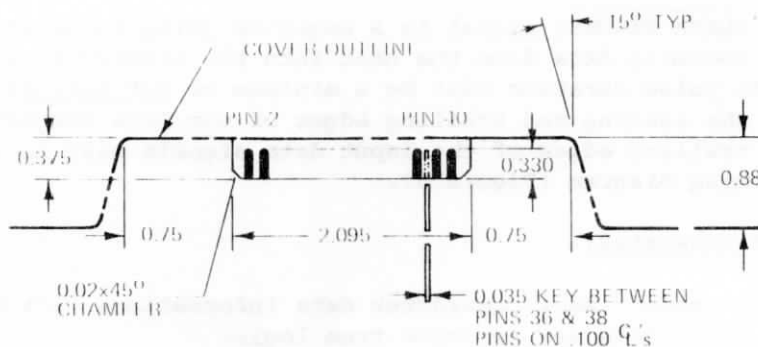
TOP VIEW OF PRINTER INTERFACE CONNECTOR
